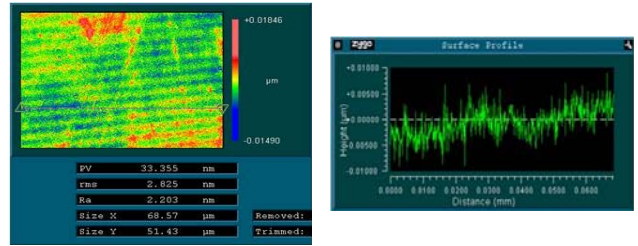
Machined shape of fused silica glass surface roughness by MR polishing (Ra=2.203nm)
